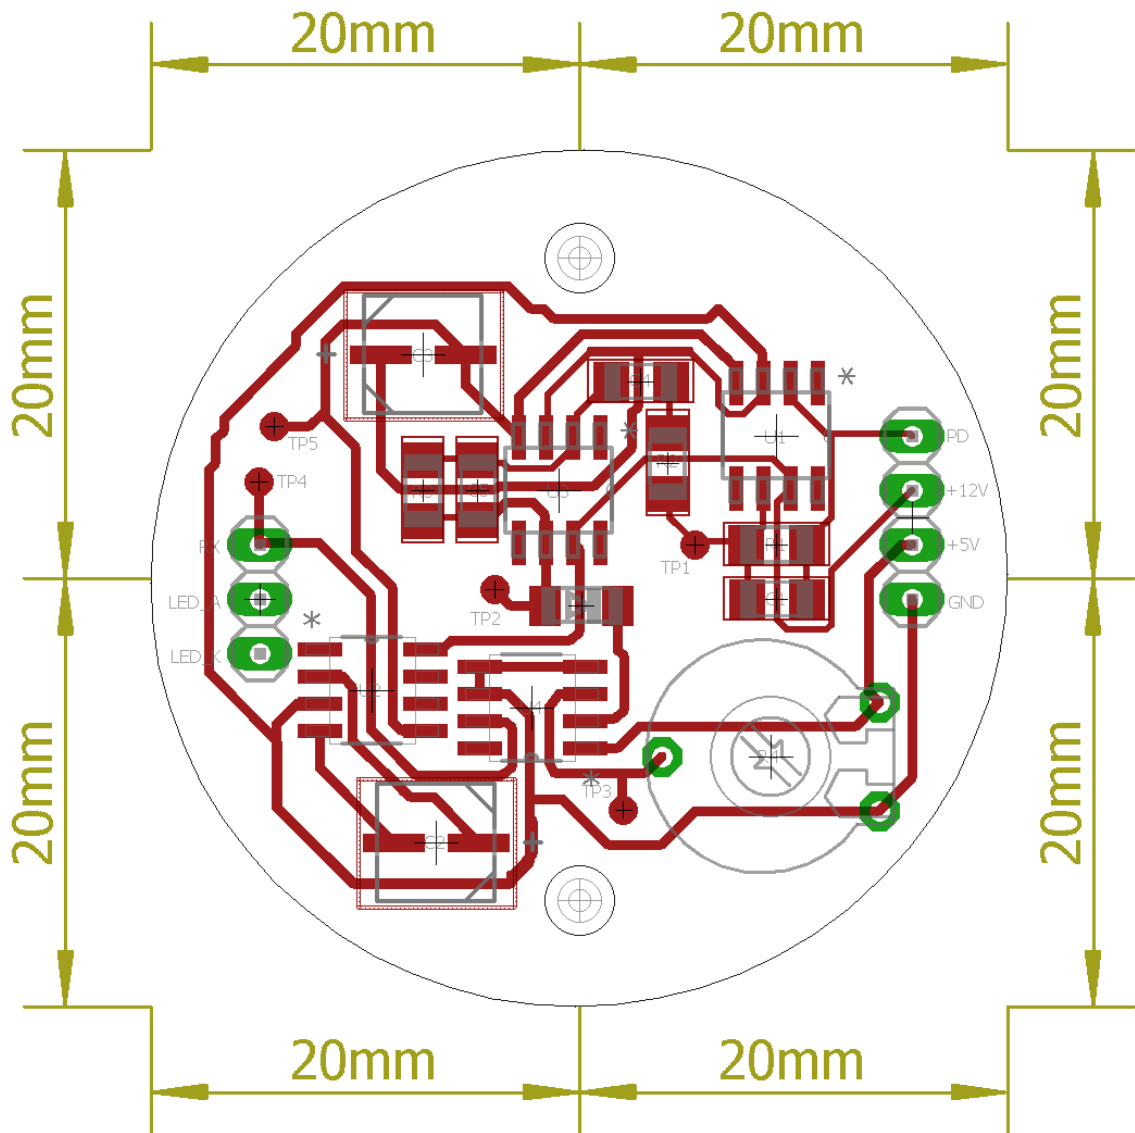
Initial PCB Footprint - Rx layer (only top layer).
